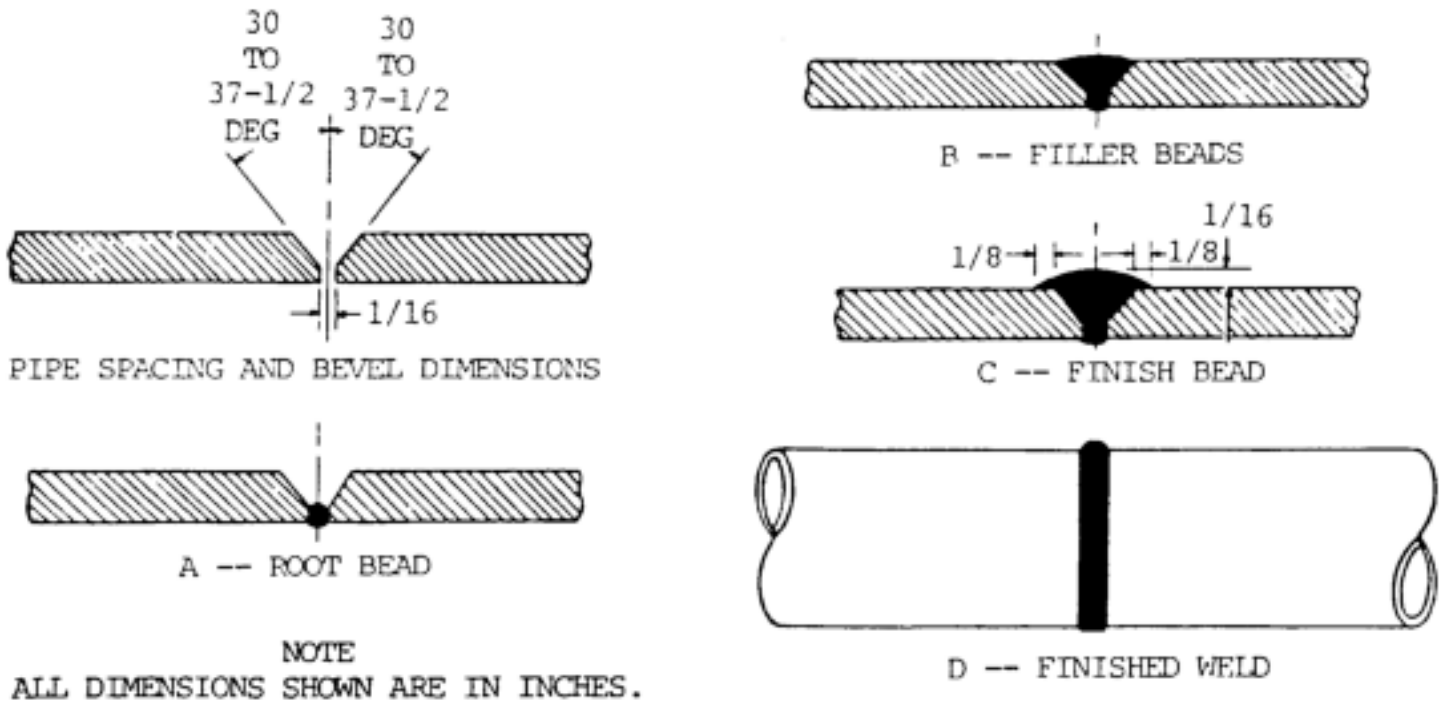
Deposition of root, filler, and finish weld beads.
